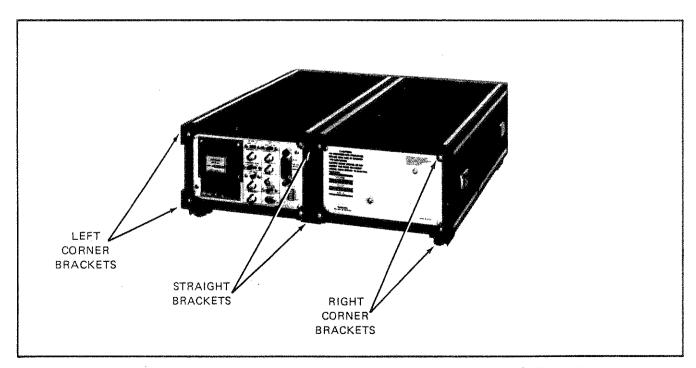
Rear Panel Brackets, 560A Horizontal Chassis
